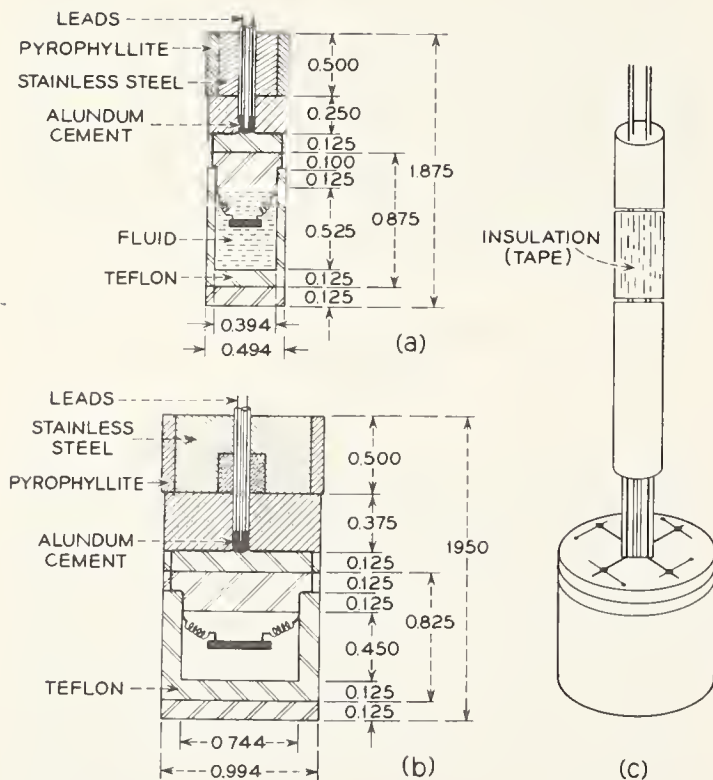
The dimensions of the parts in inches, for  $\frac{1}{2}$ -in and 1-in diam (O.D.) Teflon cell assembly.
